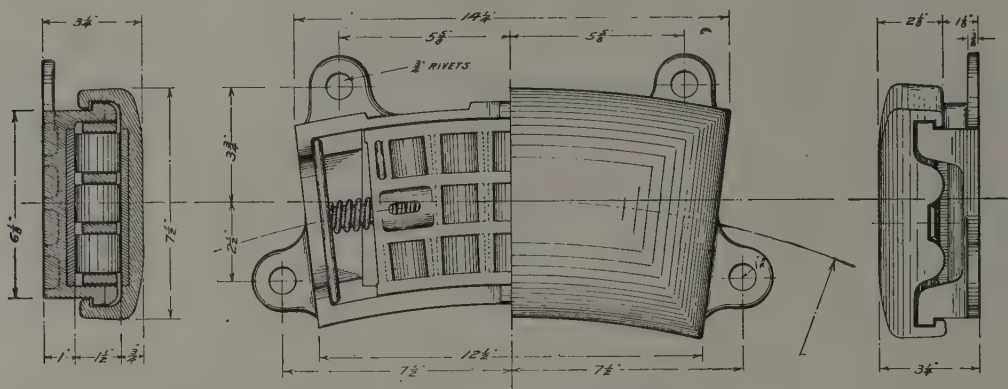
Perry Side Bearing No. 12 E for 100-Ton Capacity Cars.
